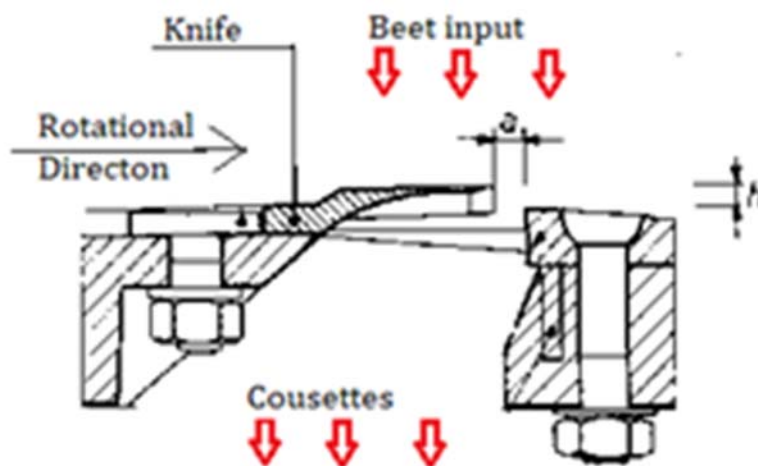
Cross-sectional side view drawing of a knife used at Volverlaten installed in a knife block.
